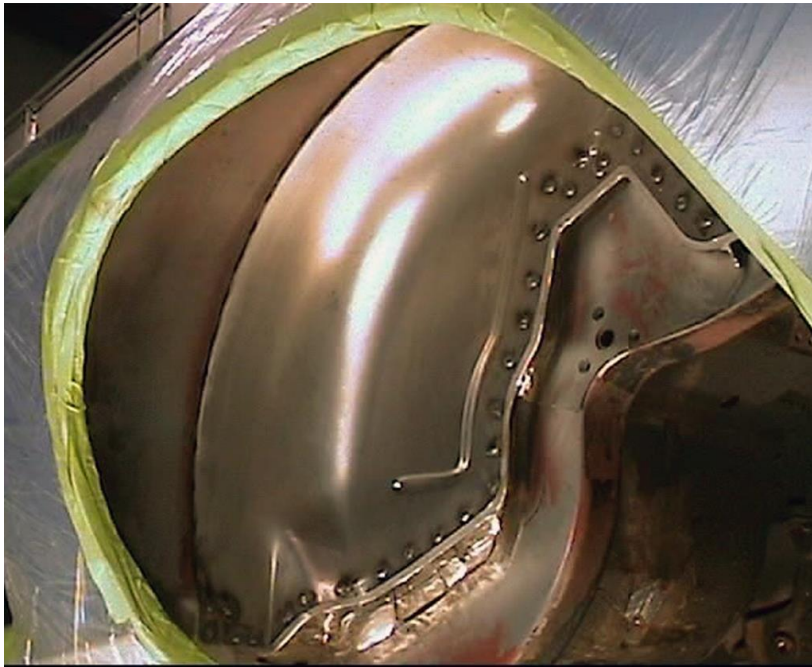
Weld Mini-Tub to Side Flanges
